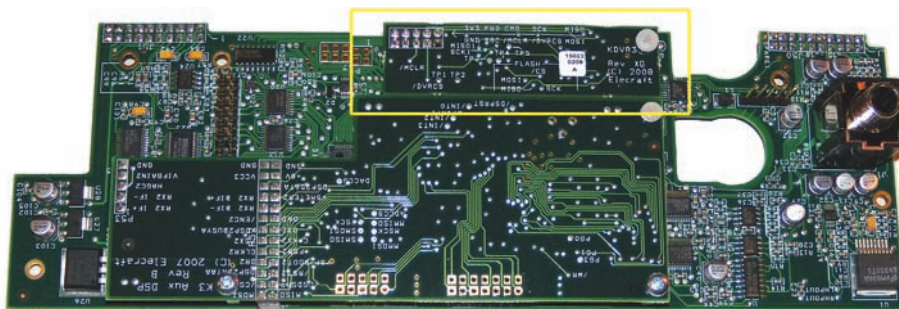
View of the K3's DSP board (the larger board) with the added KDVR3 voice memory board (the small board near the top center of the DSP board).
